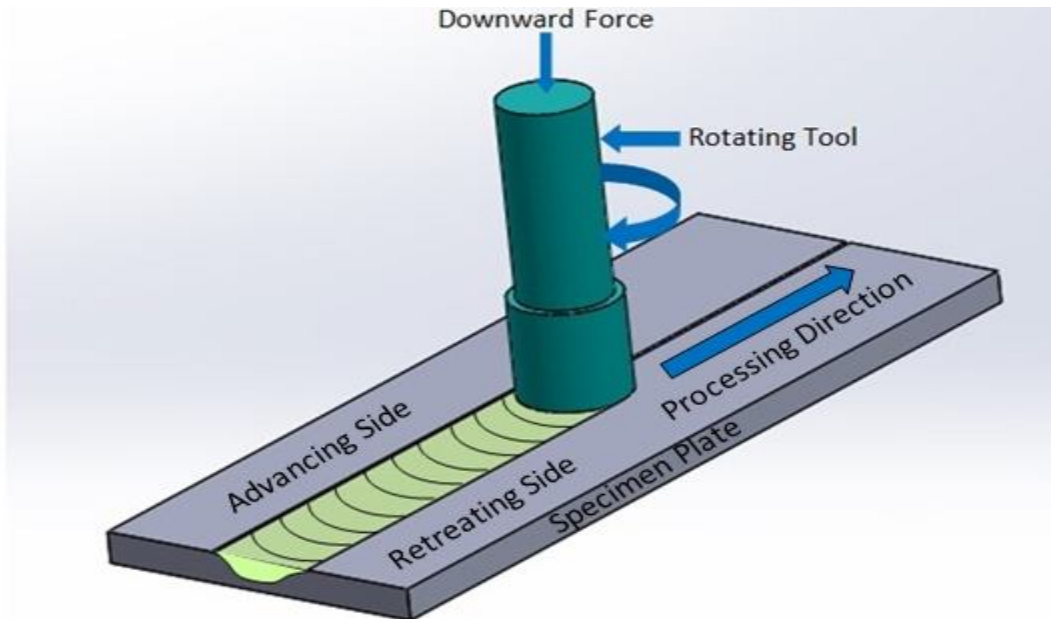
Schematic Illustration of Friction Stir Processing Technique.
